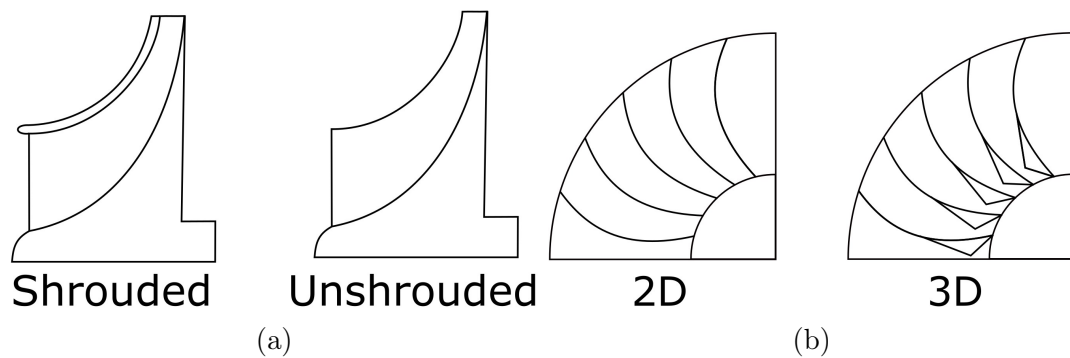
Variations of impeller designs a) shrouded and unshrouded impellers; b) impeller with 2D and 3D blades
